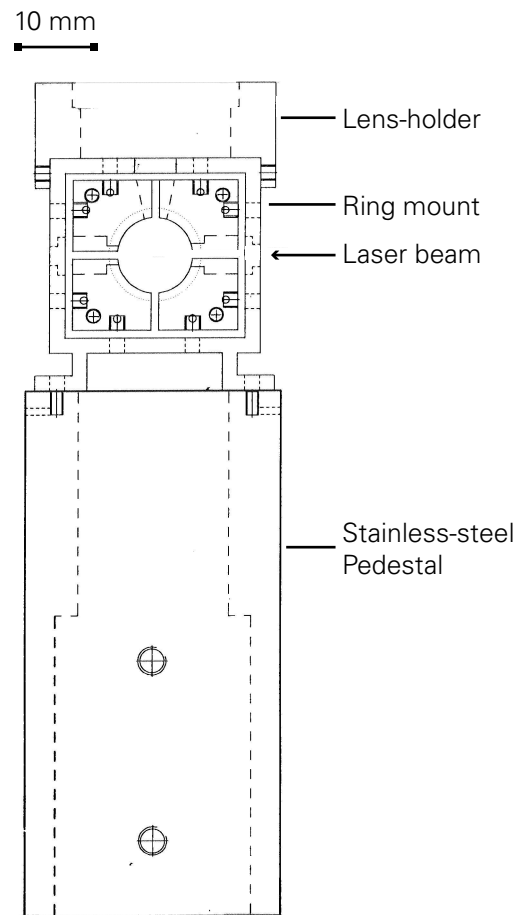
The ring electrode in its holder, mounted on the stainless-steel pedestal.
